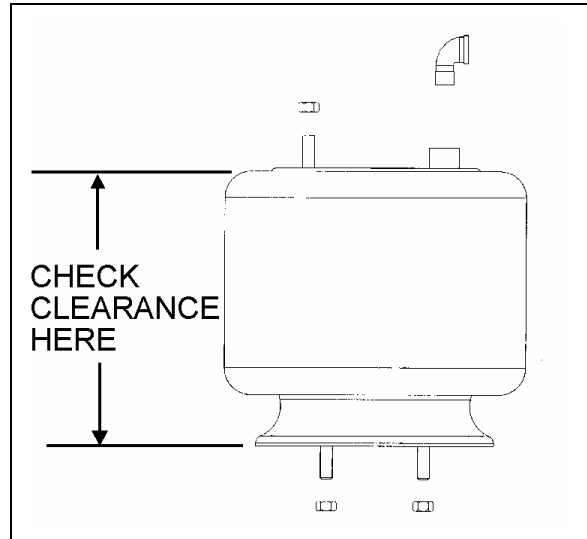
TYPICAL AIR SPRING CLEARANCE
